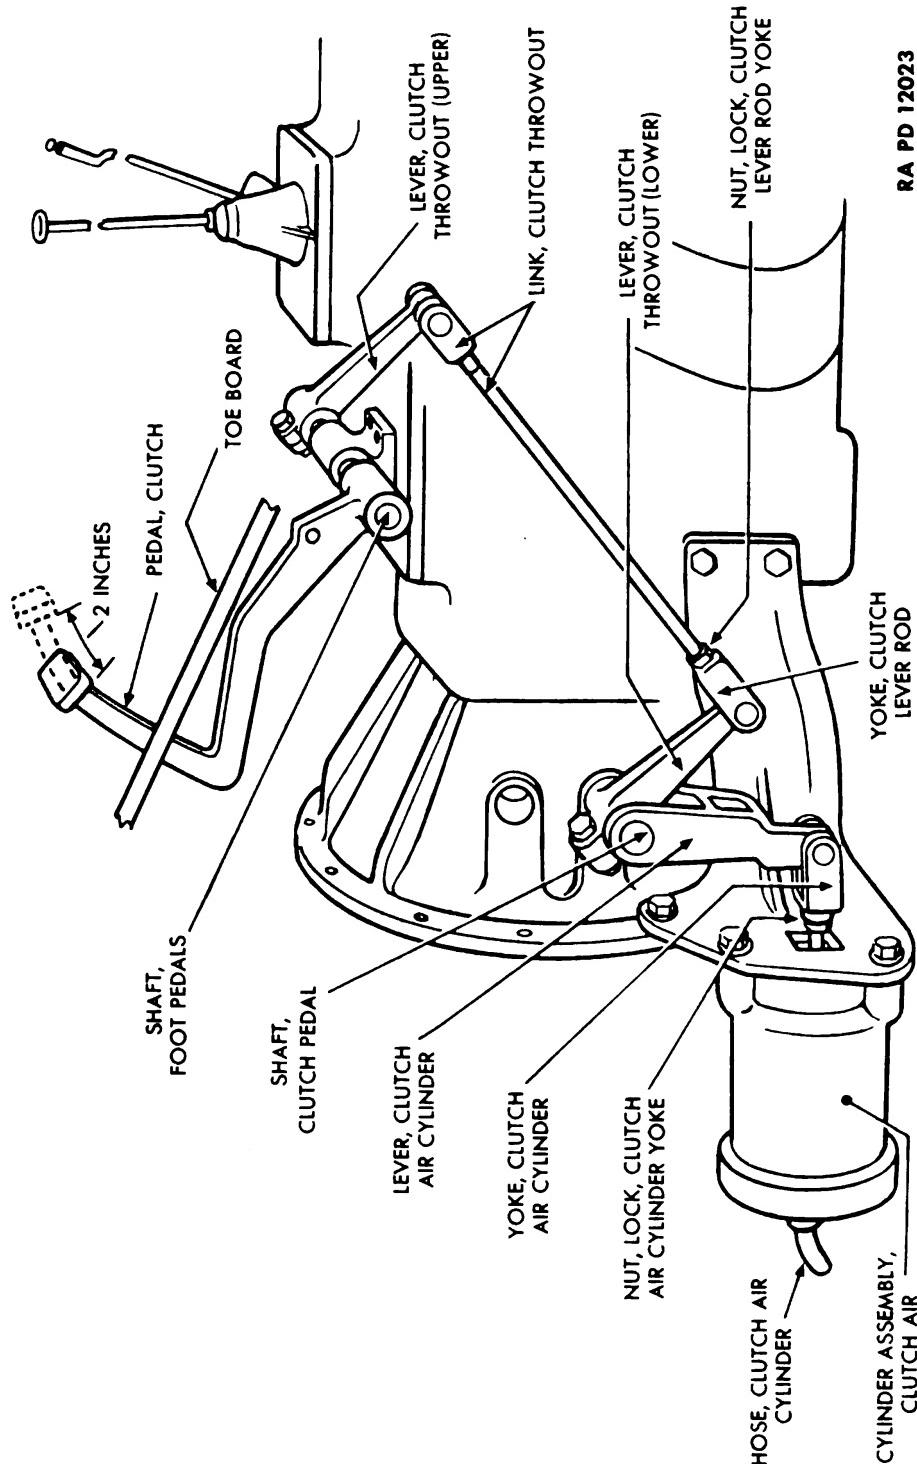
Clutch Pedal to Clutch Air Cylinder Linkage
